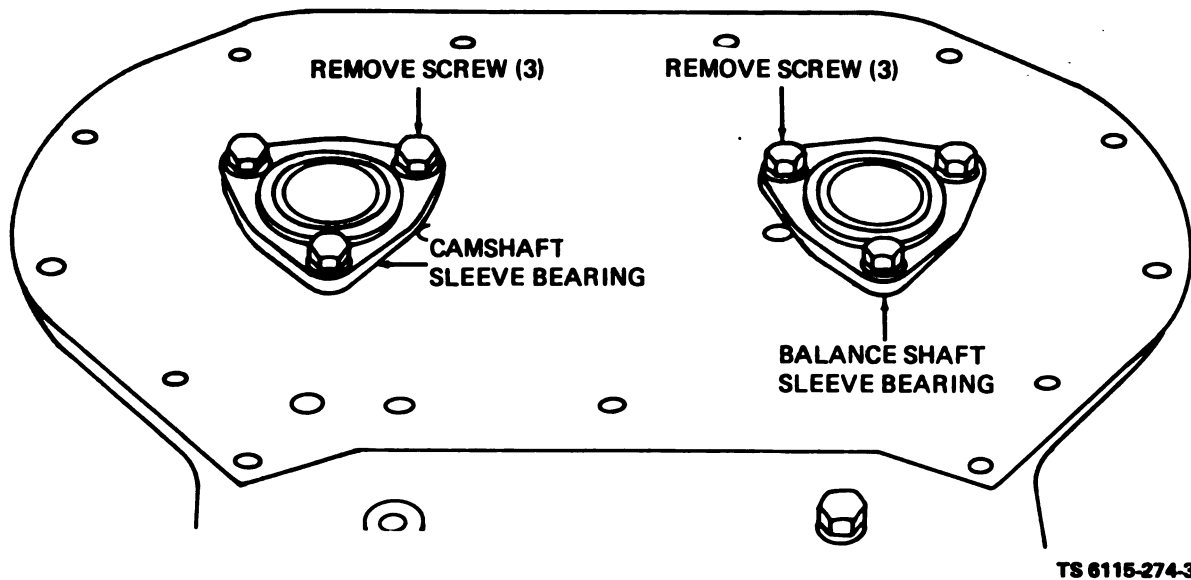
Front Sleeve Bearings, Removal and Installation
